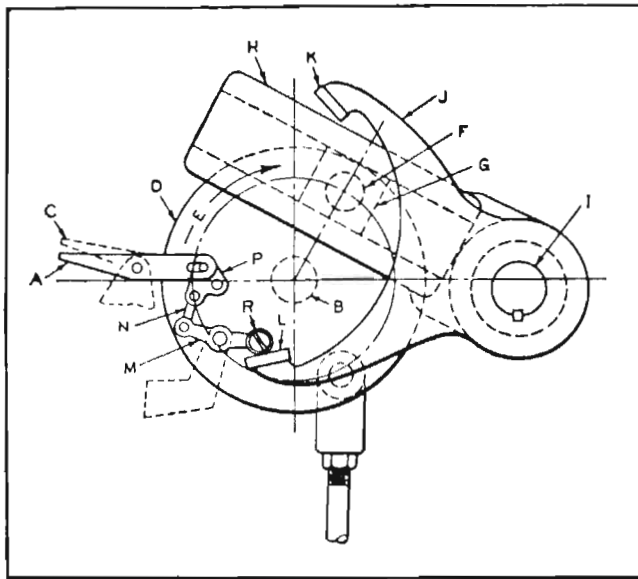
Tripping Mechanism Operated by Rotating Shaft *B* which Shifts Lever from Position *A* to Position *C* and Back Again with Dwell Between Movements.
